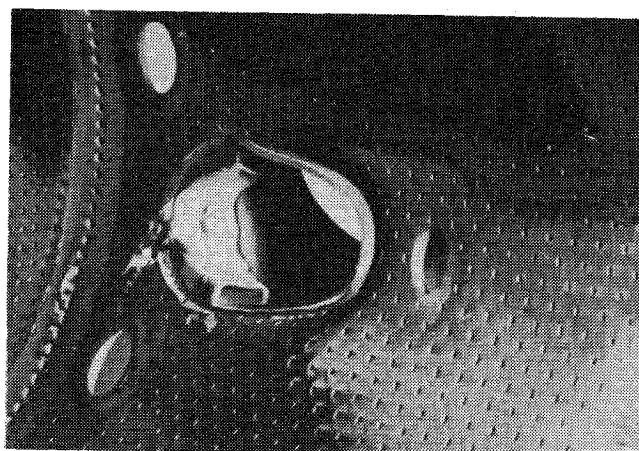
TF41 Lamilloy combustor crossover tube (internal view).
